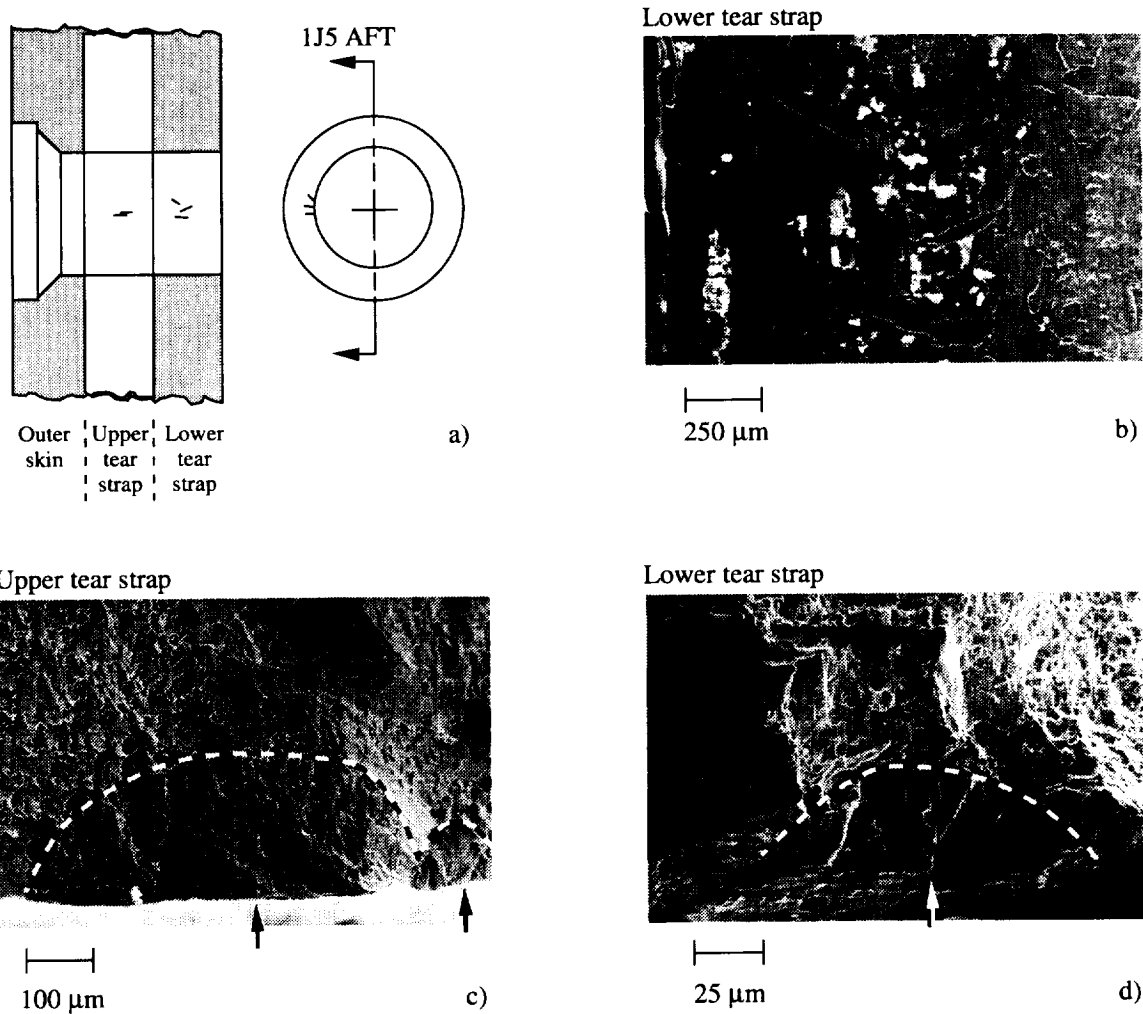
a) The schematic shows the rivet hole 1J5 configuration and the location of upper and lower tear strap fatigue cracks oriented in the aft direction and about the 9 o'clock position. b) The SEM micrograph shows the inside surface of the lower tear strap rivet hole and multiple fatigue surface cracks partially opened as a result of the destructive examination straining operation. c) The SEM micrograph shows the fatigue fracture surface of the upper tear strap rivet hole surface cracks. The dashed line marks the fatigue crack front and arrows mark the likely sites of fatigue crack initiation. The irregular shape of the crack front is a due to multiple crack coalescence. d) The SEM micrograph shows the fatigue fracture surface of the lower tear strap rivet hole surface crack (upper most crack in Figure 6.23.b). An arrow marks the site of crack initiation.
